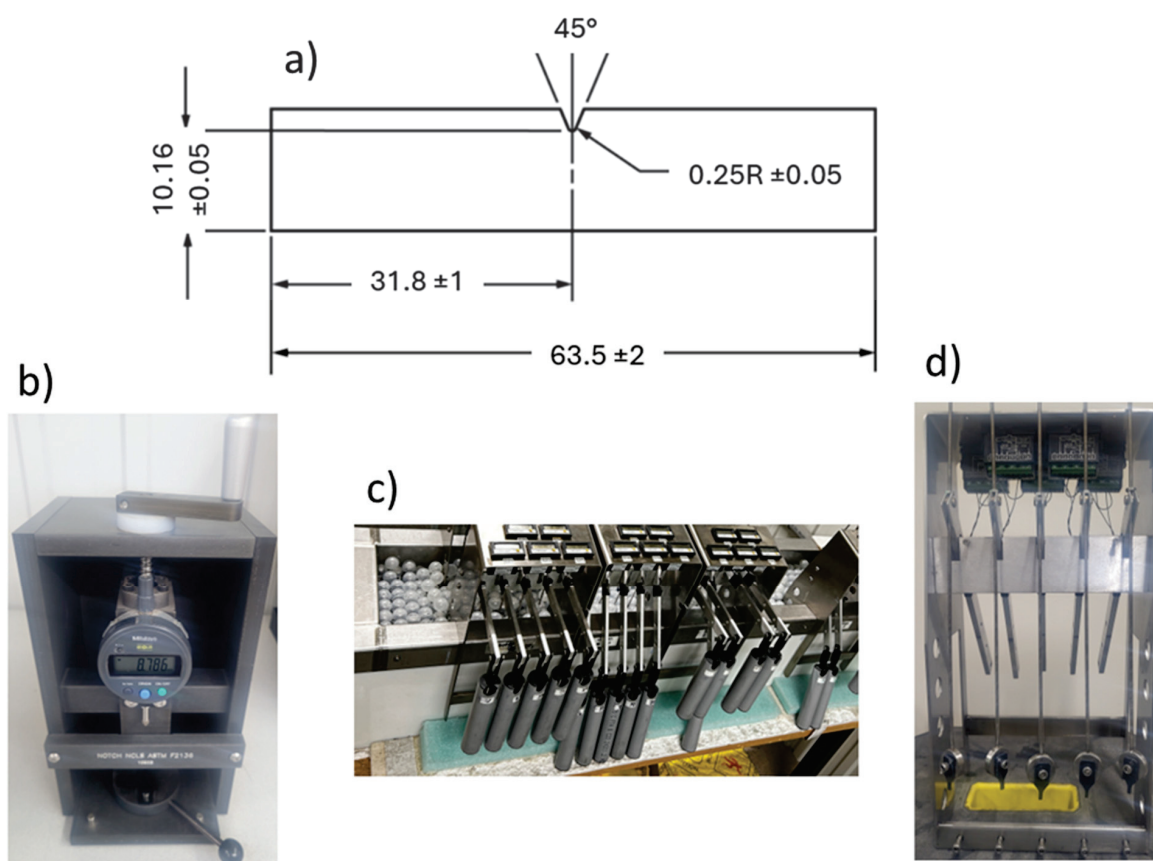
Steps of the NCLS test. Specimen (a) dimension [36], (b) notching, (c) loading in the test basin, and (d) failure.
